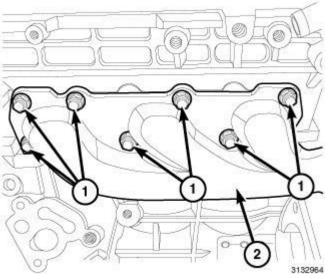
Left Exhausts Manifold & Nuts Courtesy of CHRYSLER GROUP, LLC
